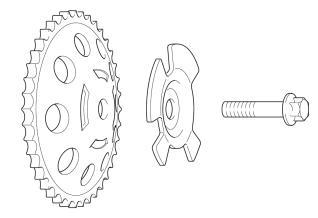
Correct installation sequence on the inlet camshaft when replacing sprockets made of pressed steel.
